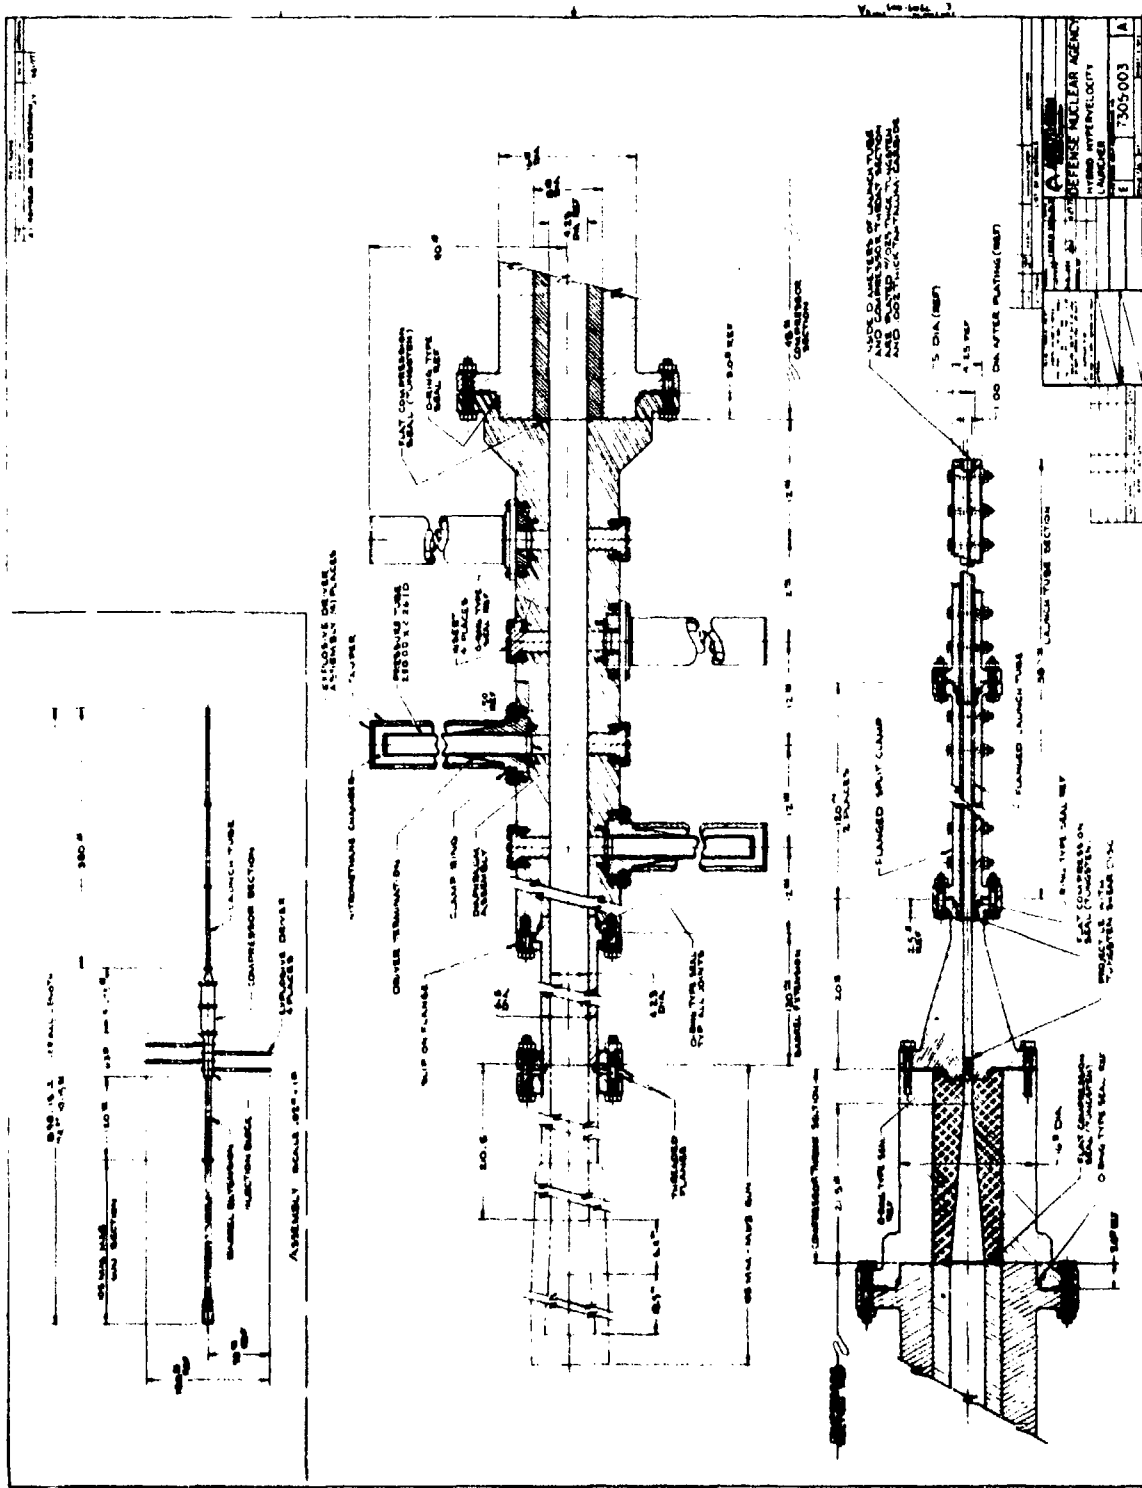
1-inch bore (1/4-scale) hybrid launcher assembly drawing.
